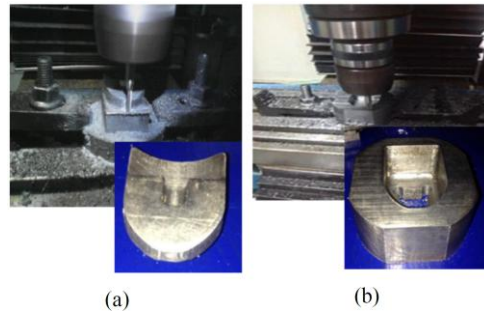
Metal milling with CAD/CAM technology using a CNC machine (a) core mold
